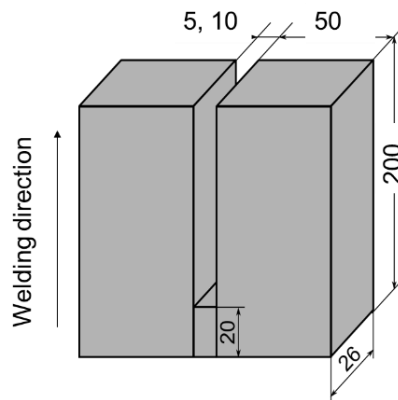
Specimen dimension and weld joint configuration
